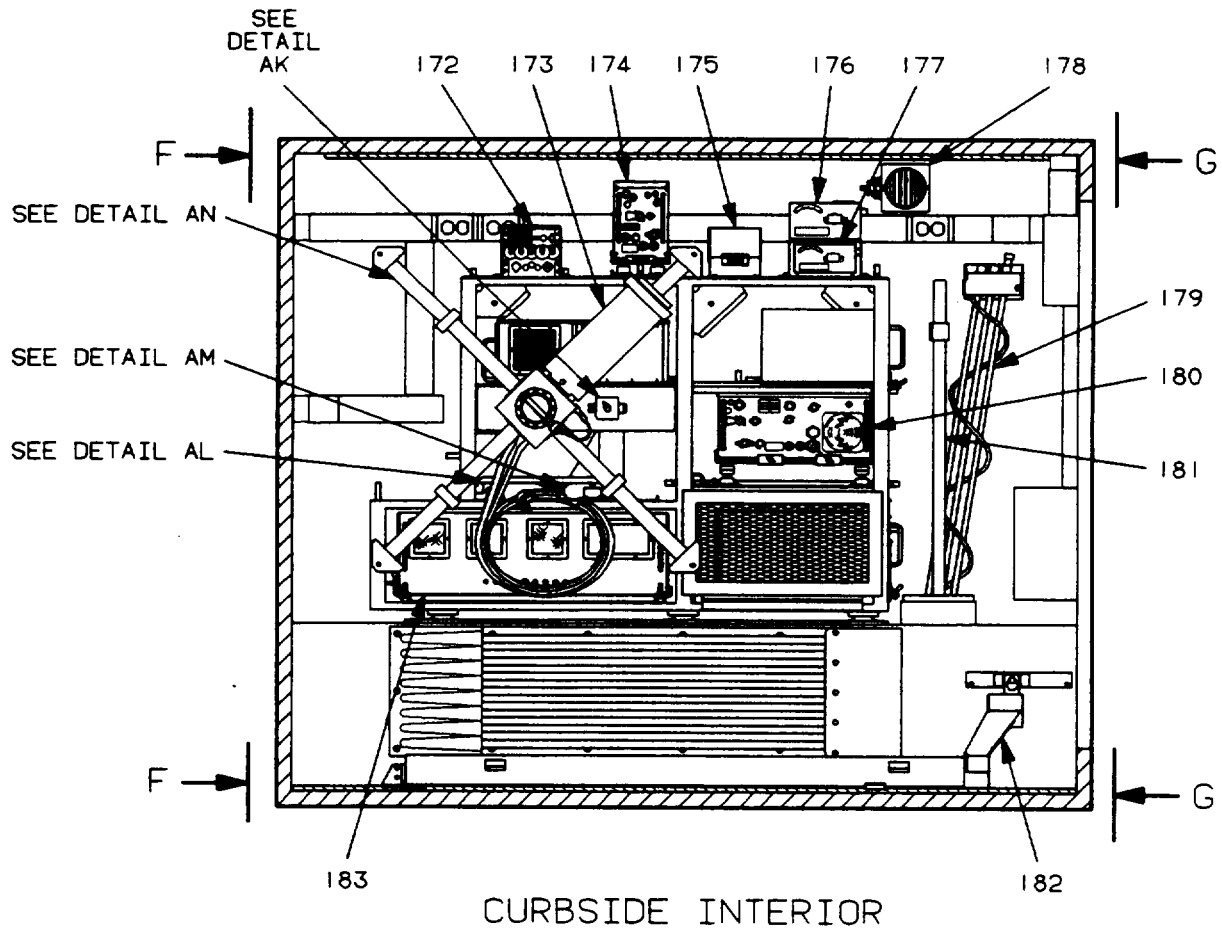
SHELTER ASSEMBLY (SHEET 14 OF 24)
